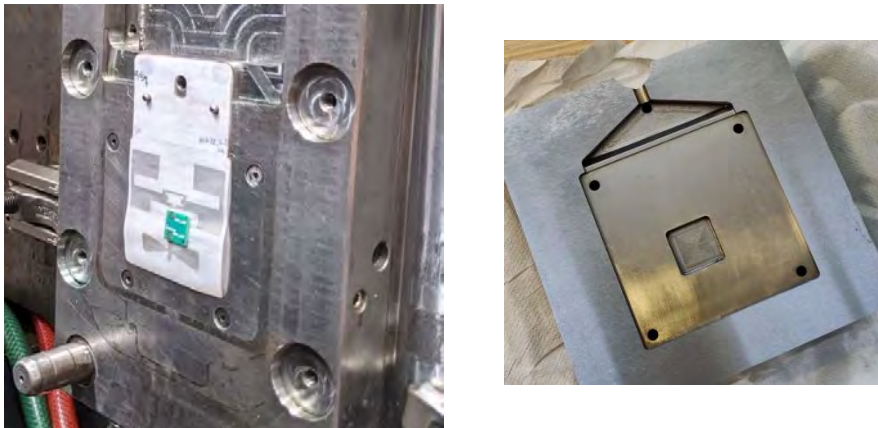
Manufactured insert: (a) Injection side; (b) Ejection side.
